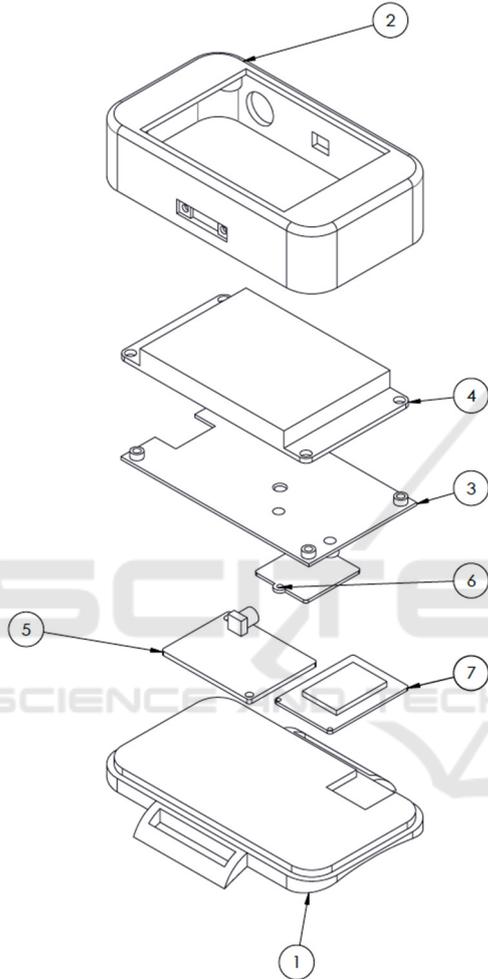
Exploded Device with Fusion360 CAD Software. “Fit to wrist” configuration.
